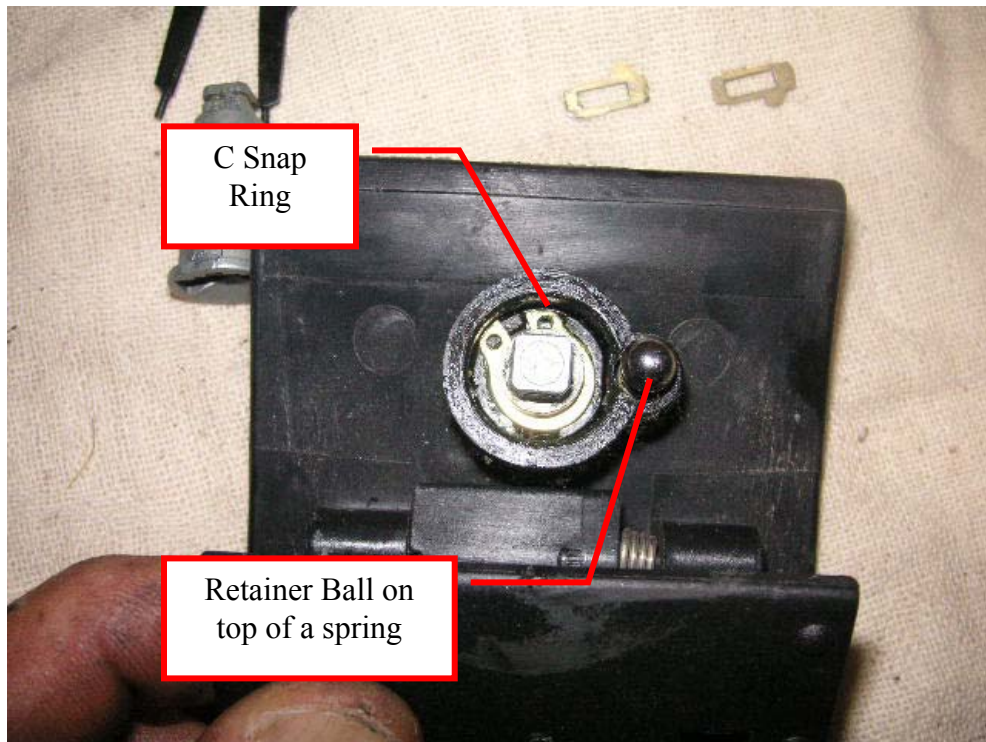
Tumbler inside the lock barrel, held in place by a C snap ring.
